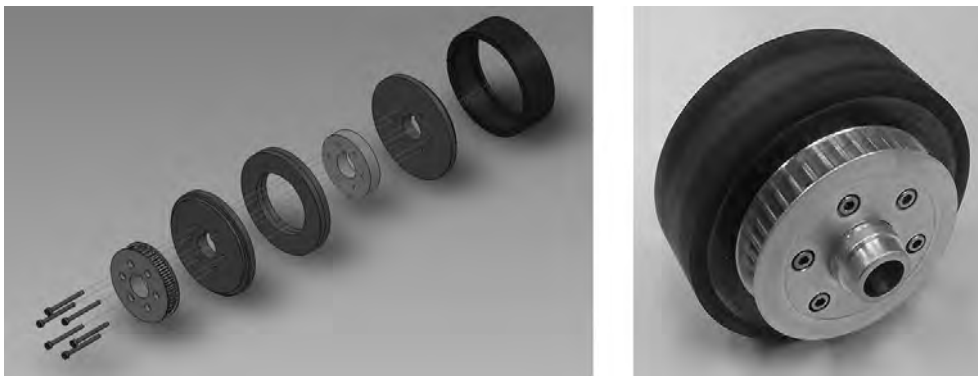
Magnetic wheel's exploded vision (left) and built magnetic wheel (right).
